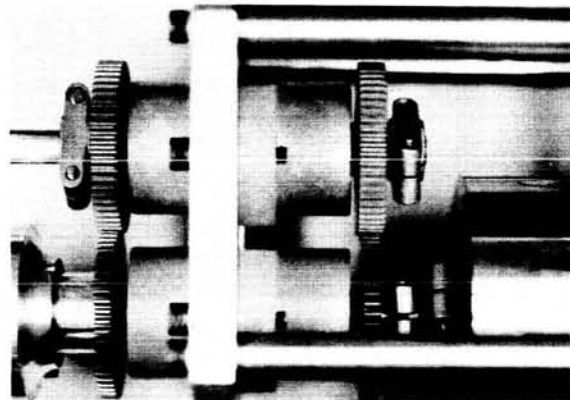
The *in situ* coated gears assembled in the four square gear tester, before the test.
